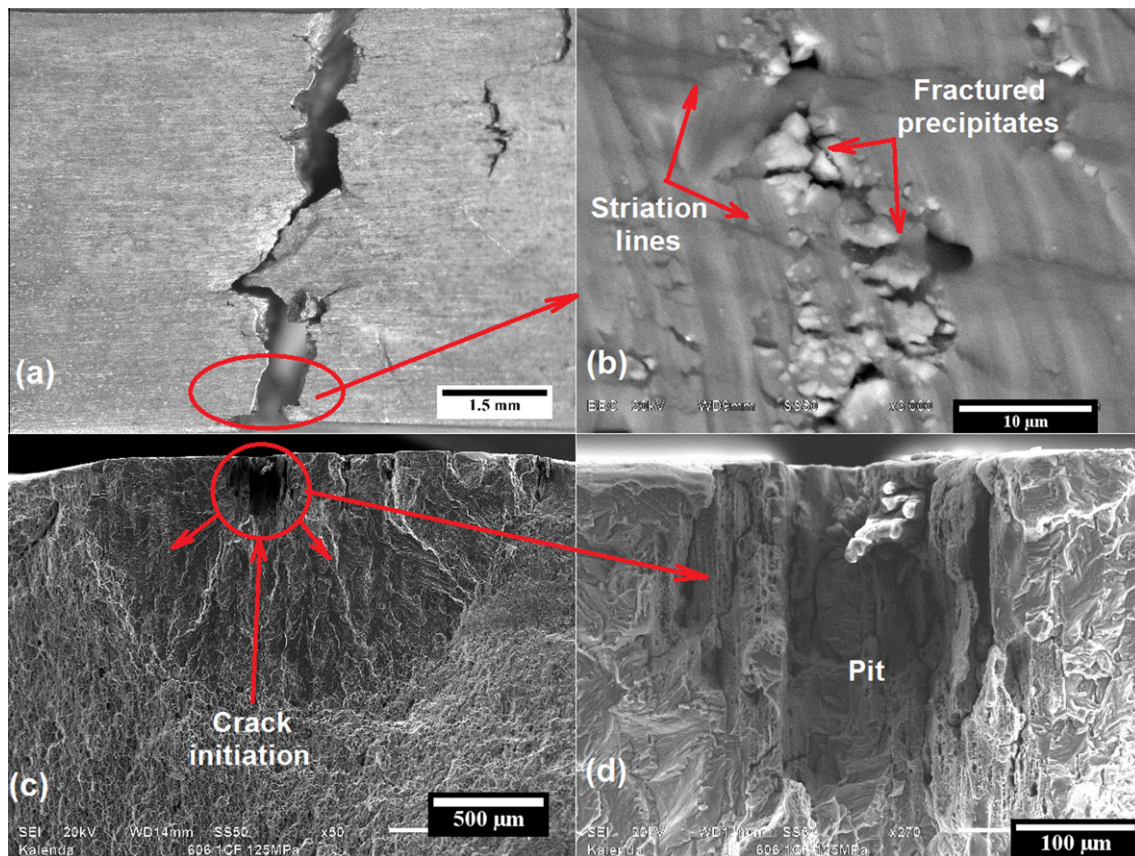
Failure of unwelded aluminium 6061-T651 in a 3.5% NaCl solution: (a) crack location; (b) corrosion pits associated with fractured precipitates on the fracture surface; (c) the fatigue crack initiation site; and (d) a corrosion pit at the crack initiation site.
